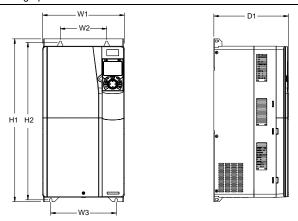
Wall-mounting diagram of inverters of 380 V, 45 to 75 kW
